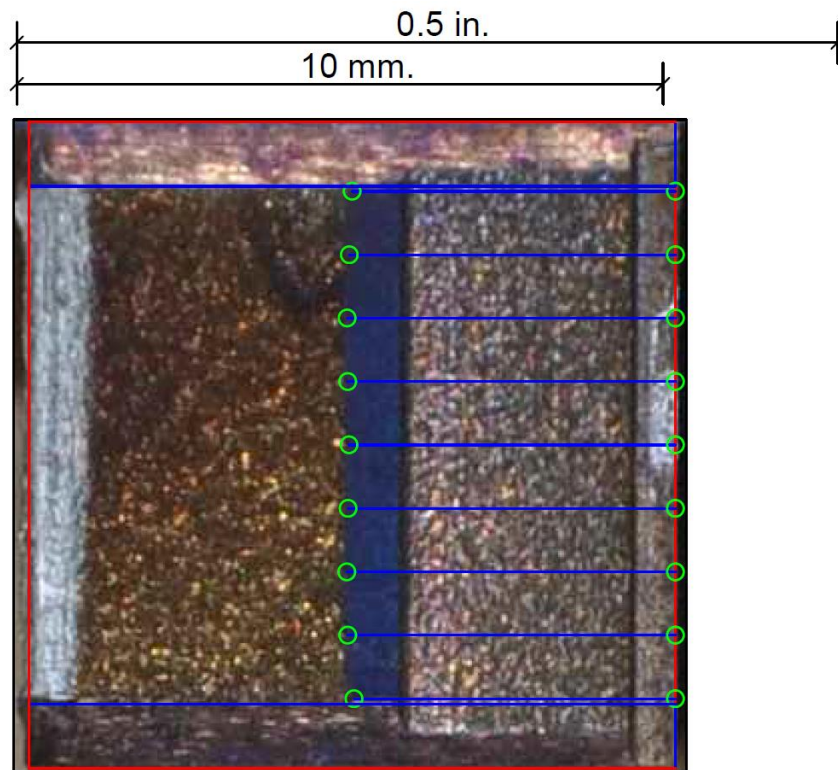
Specimen D22' Fracture Surface
